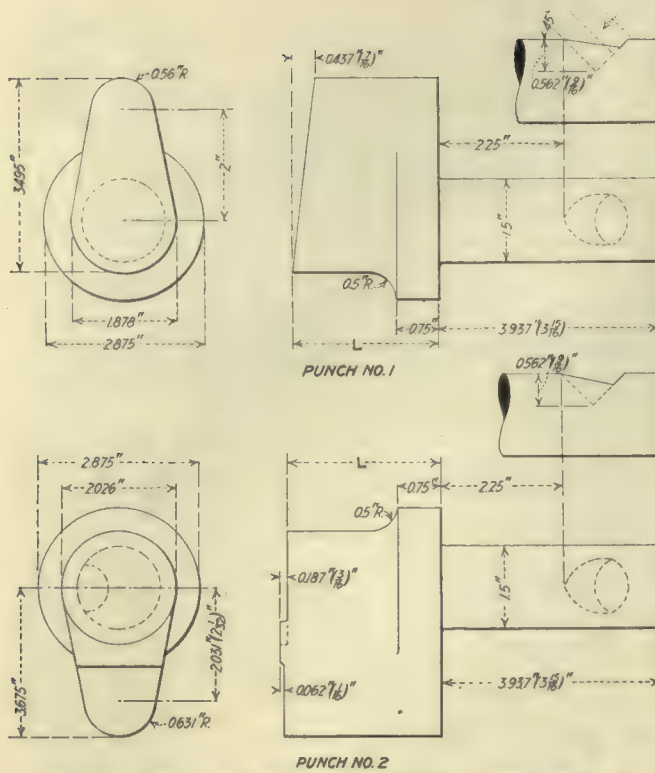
FORGING DIES FOR BRAKE CRANKSHAFT
